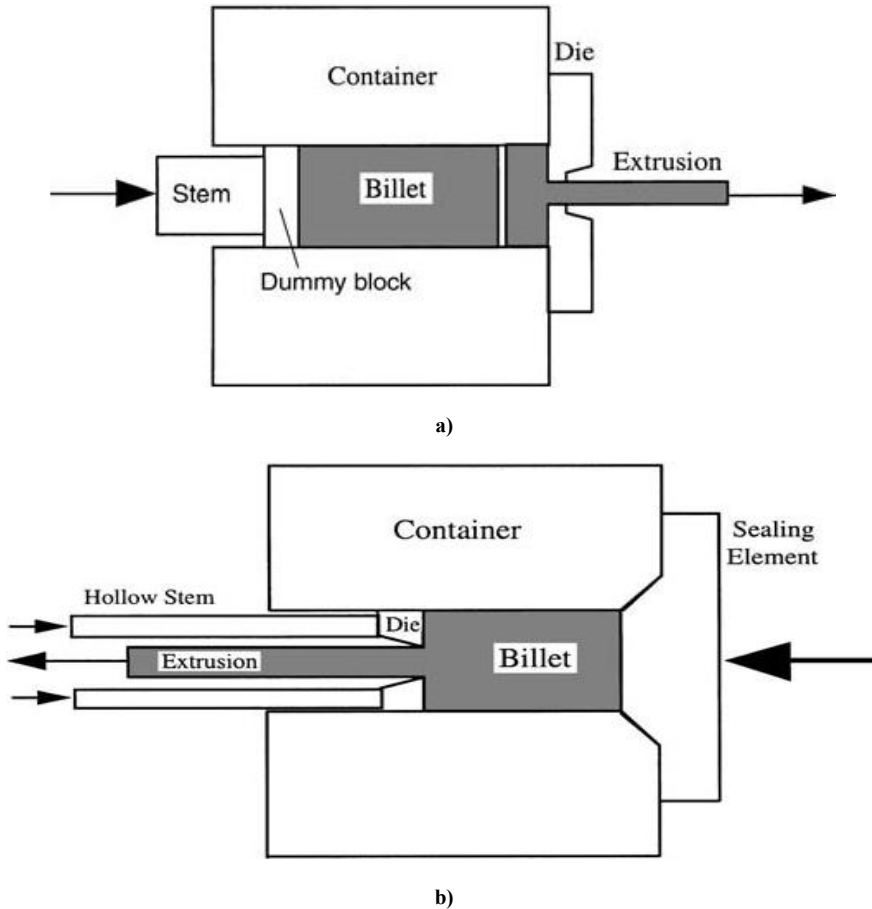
Types of extrusion: a) direct extrusion; b) indirect extrusion
